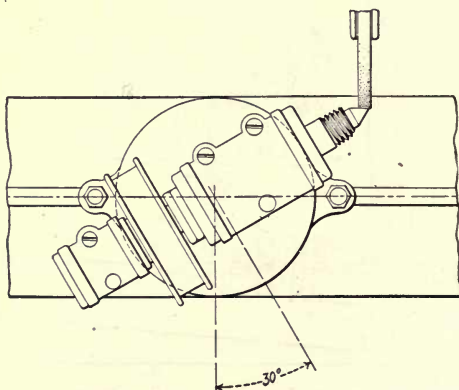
Grinding a center on a Brown & Sharpe universal grinding machine.
